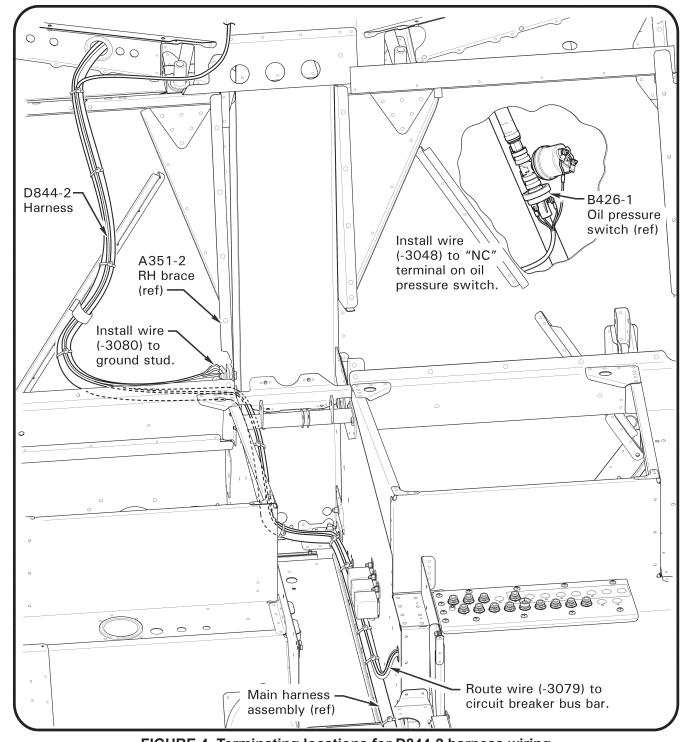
Terminating locations for D844-2 harness wiring (view looking aft)
